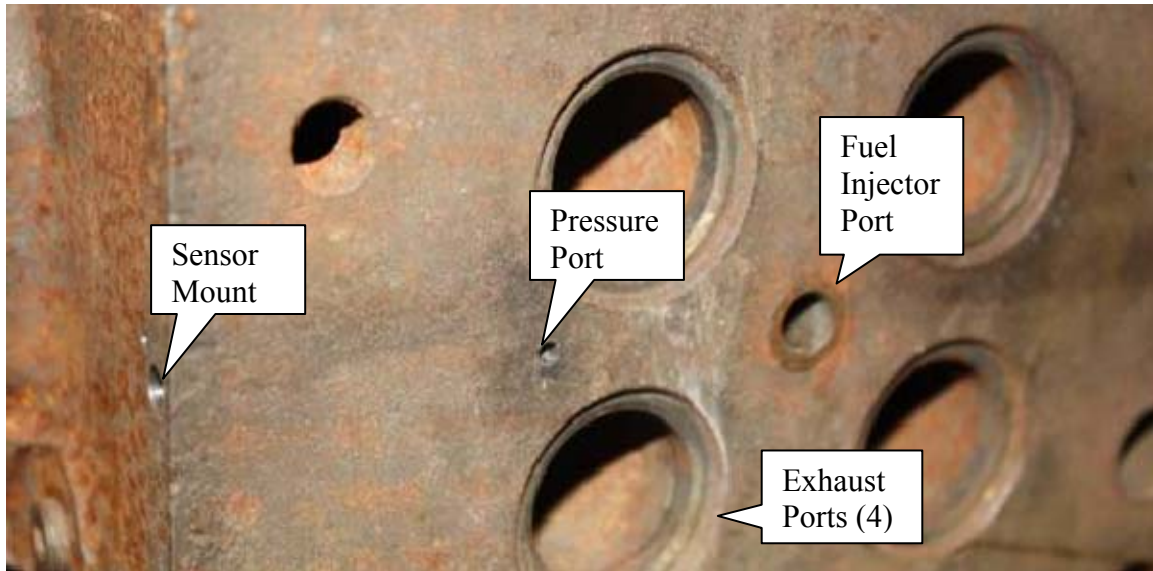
Cylinder Head Machine Work on Exemplar Cylinder Head
